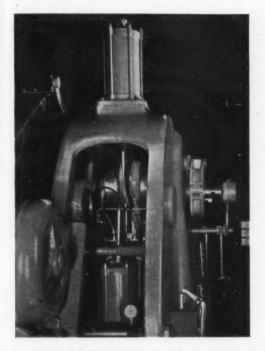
H.M.E. Crank Press with a 6-in. Air Cylinder for Counterbalancing the Slide. The Expansion Chamber seen Between the Frames Ensures a Constant Pressure of Air
